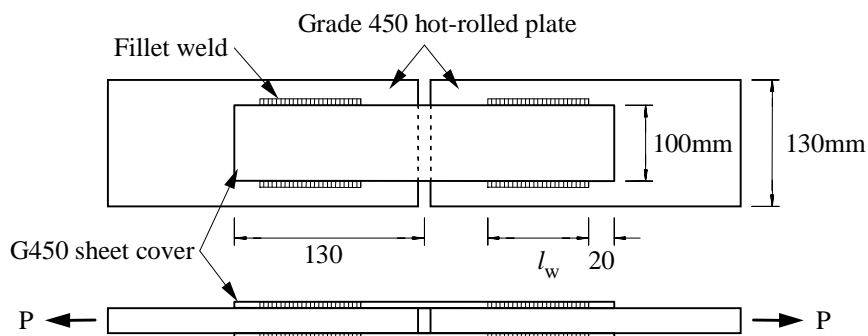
Diagram of a double-lap longitudinal fillet welded connection specimen
